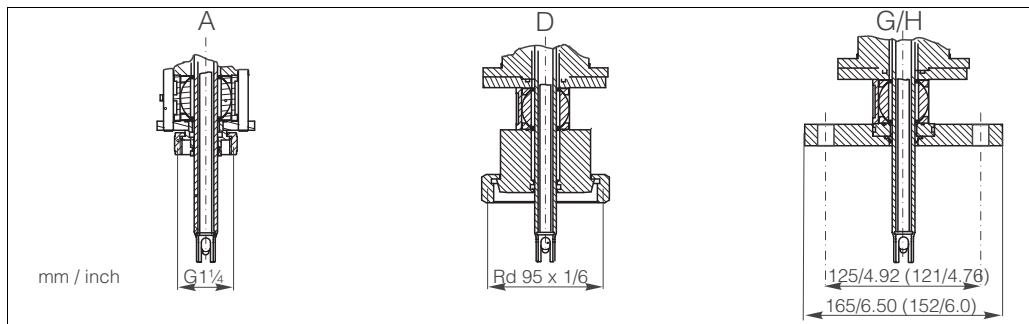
Assembly version: manual, long, for gel sensors, flange
